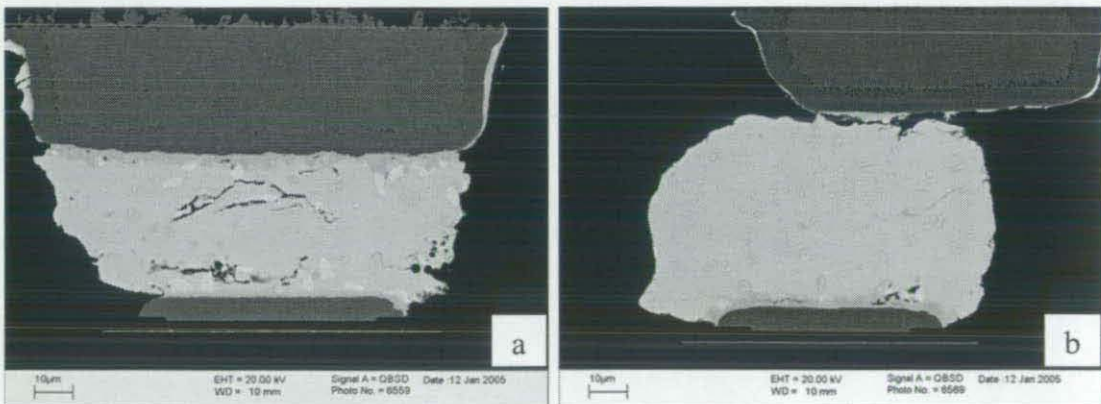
Failure mode of solder joints during thermal cycling when bare pads were used, a) failure in bulk solder and b) failure at poorly wetted interface.
